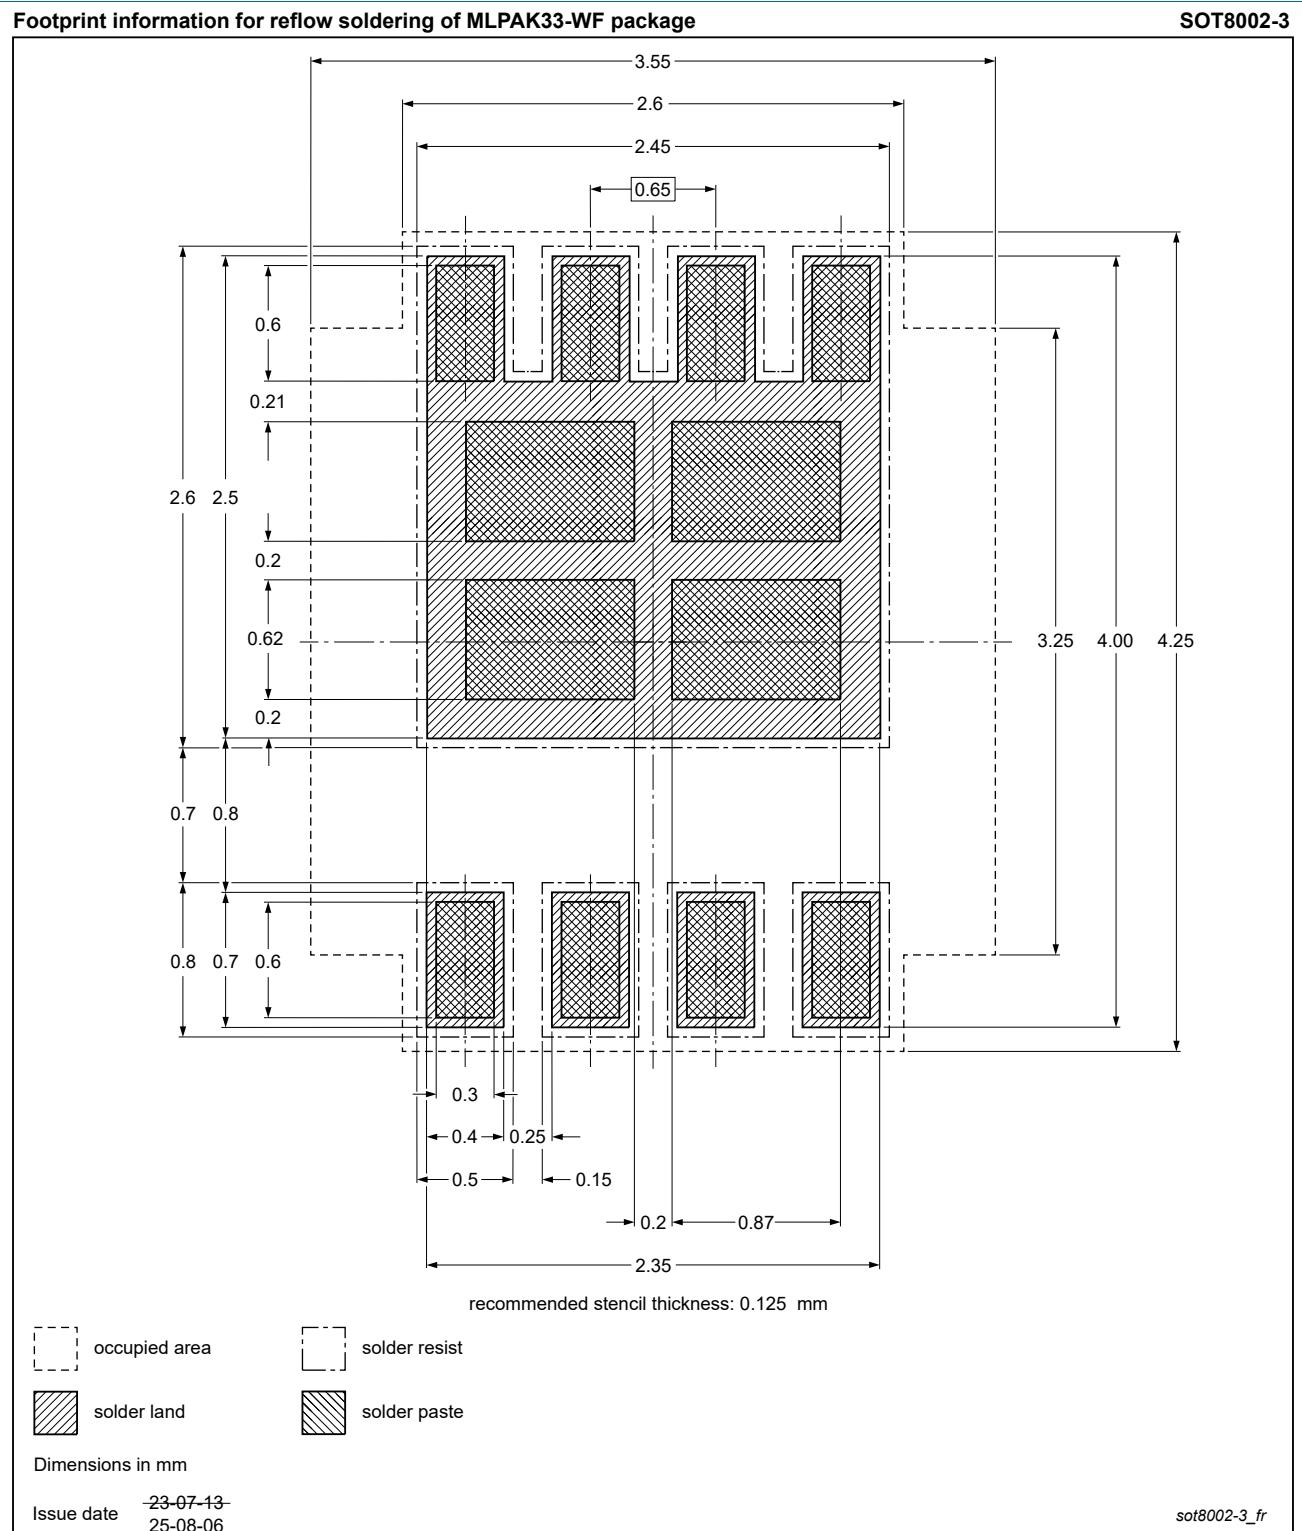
Reflow soldering footprint for MLPAK33-WF (SOT8002-3)
